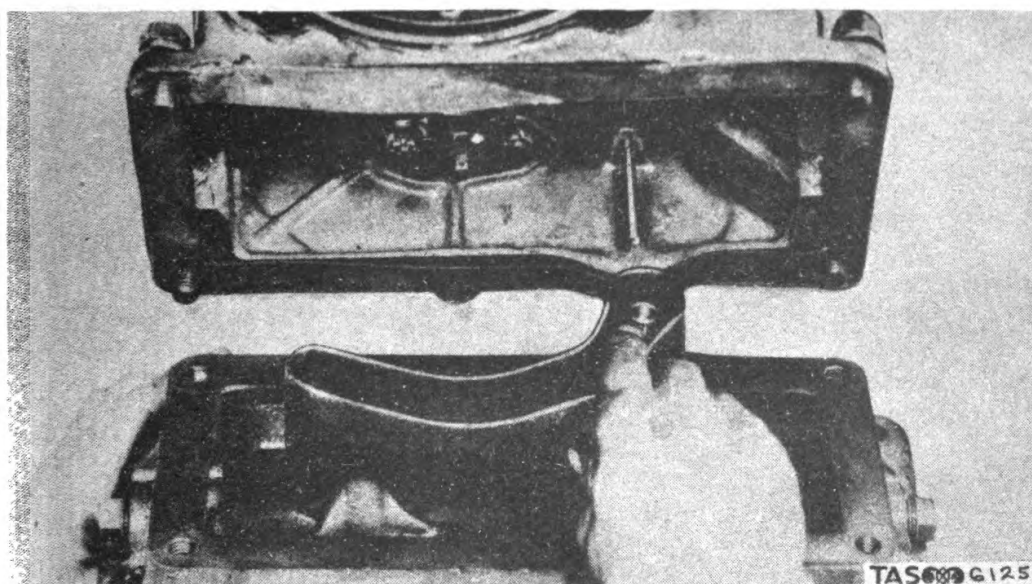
Removing Cap Screws Holding Crankcase to Engine Base and Lifting Upper Part of Engine Off Base.
